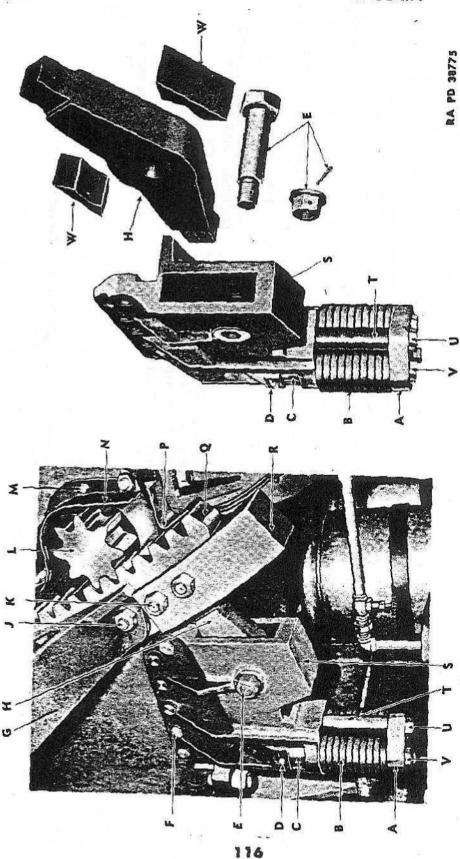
Left Elevating Buffer—Assembled View (16980 on orrosts PAGE)
